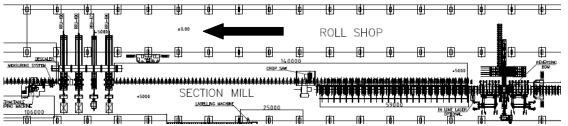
Layout with breakdown mill and 3+1 Tandem Intermediate and Finishing Universal Mill.
